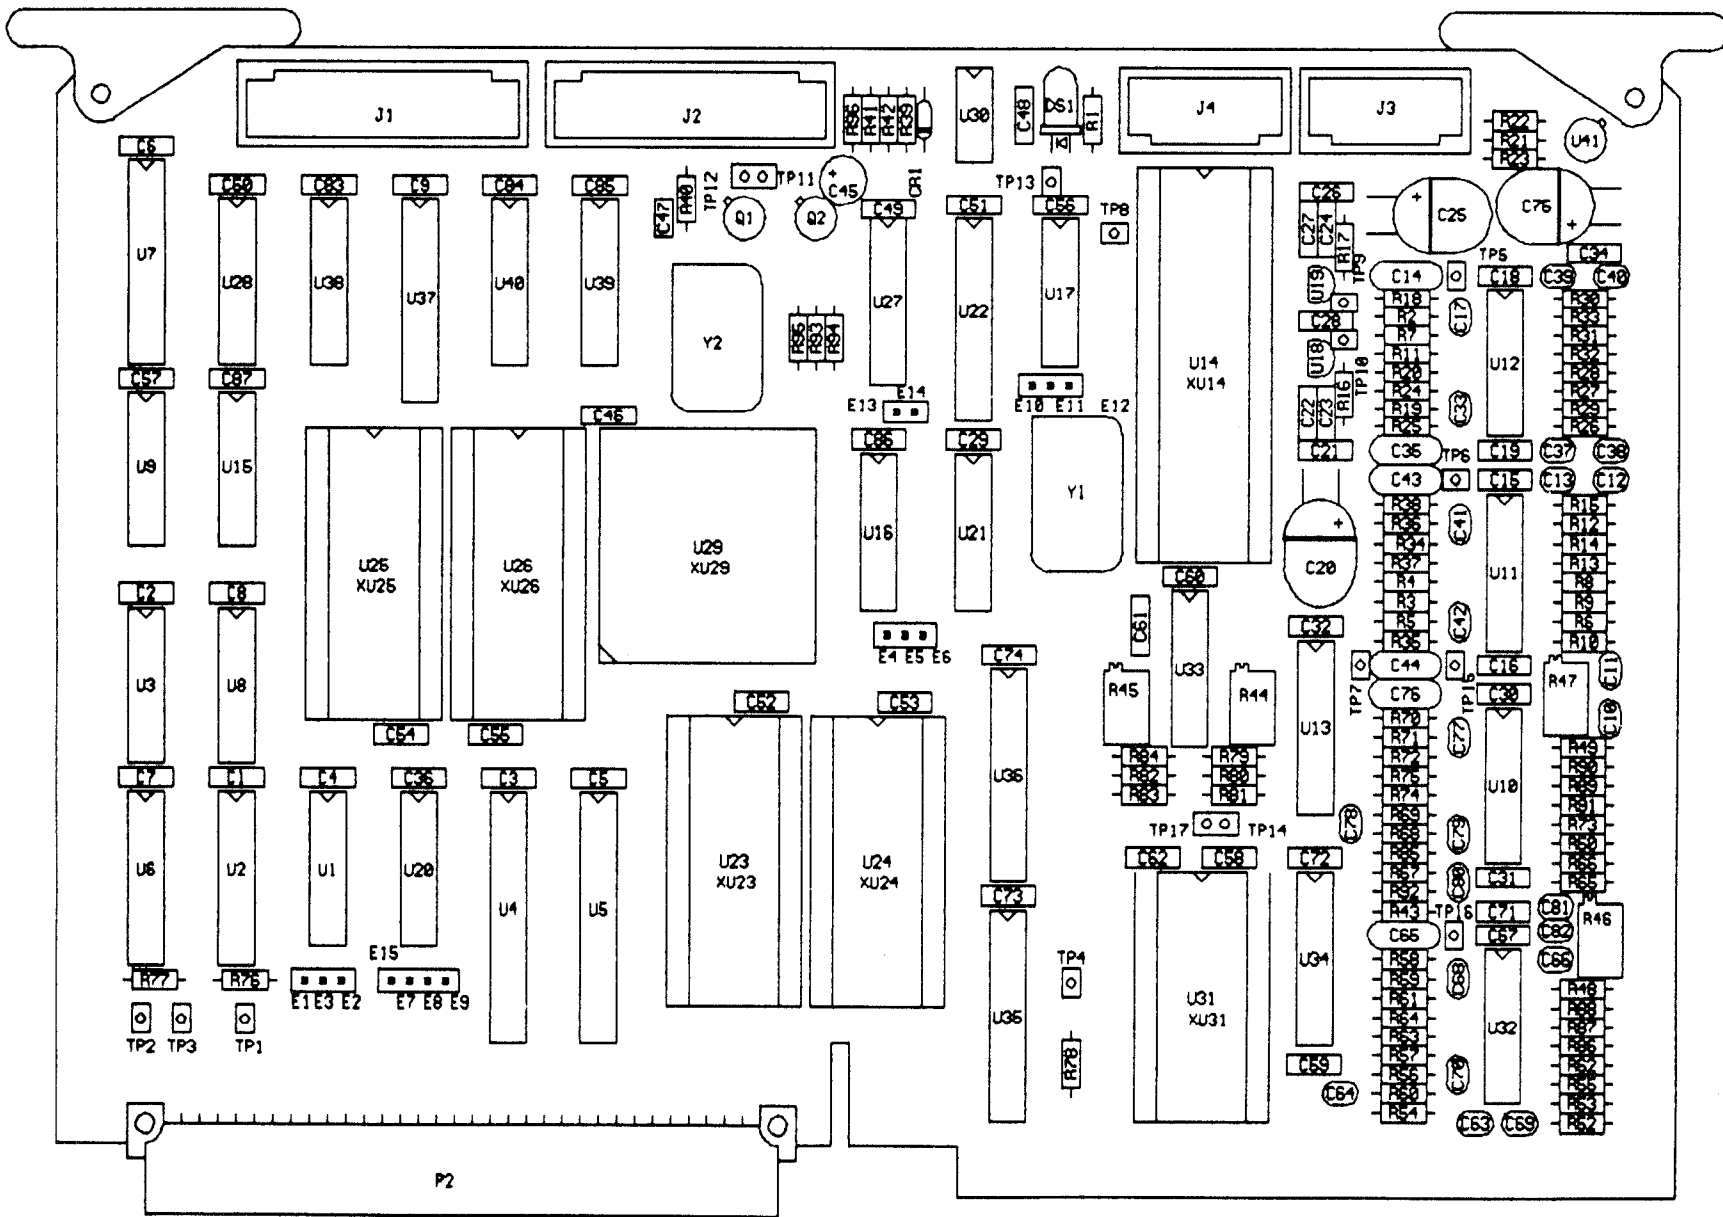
A5 FSK PWB Assembly Component Location Diagram (10133-2500, Rev. D)
